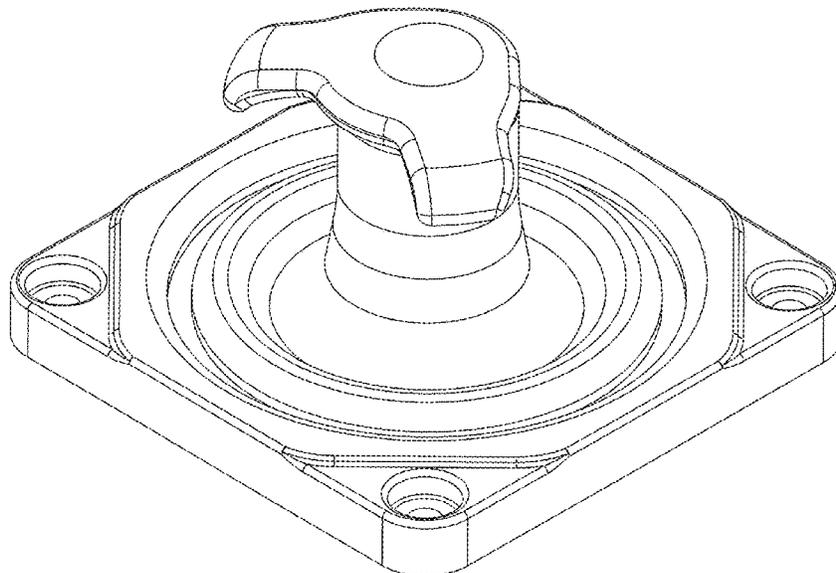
is top, rear and side perspective view of a smart bollard showing their new design;
